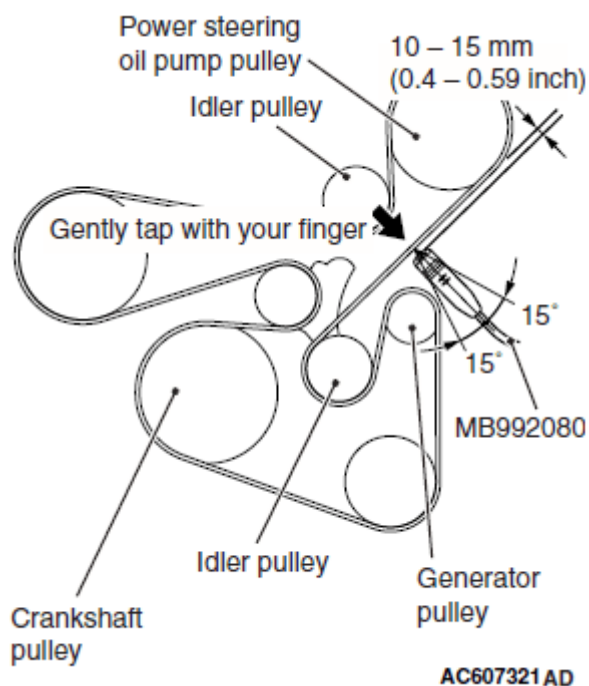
Identifying Power Steering Oil Pump Pulley And Idler Pulley
